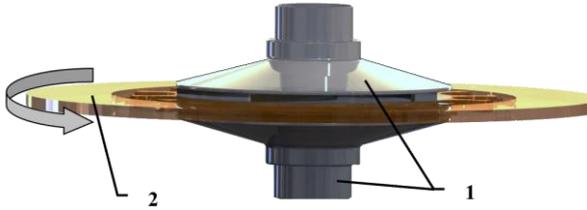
3D model of the dual impeller (1) mounted on a ring rotor (2)
